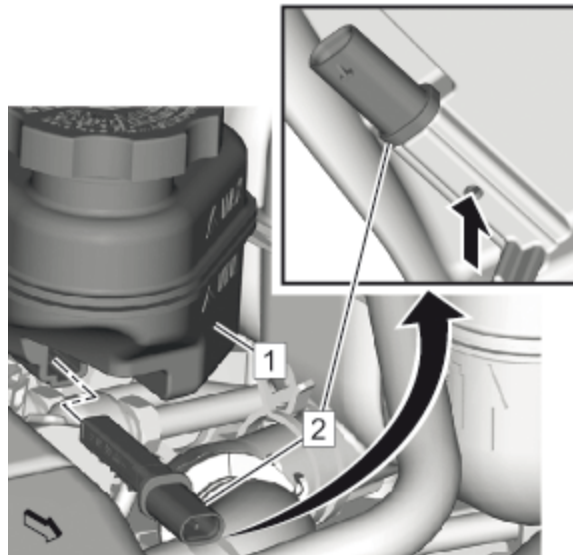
Brake Fluid Level Sensor And Brake Master Cylinder Reservoir
